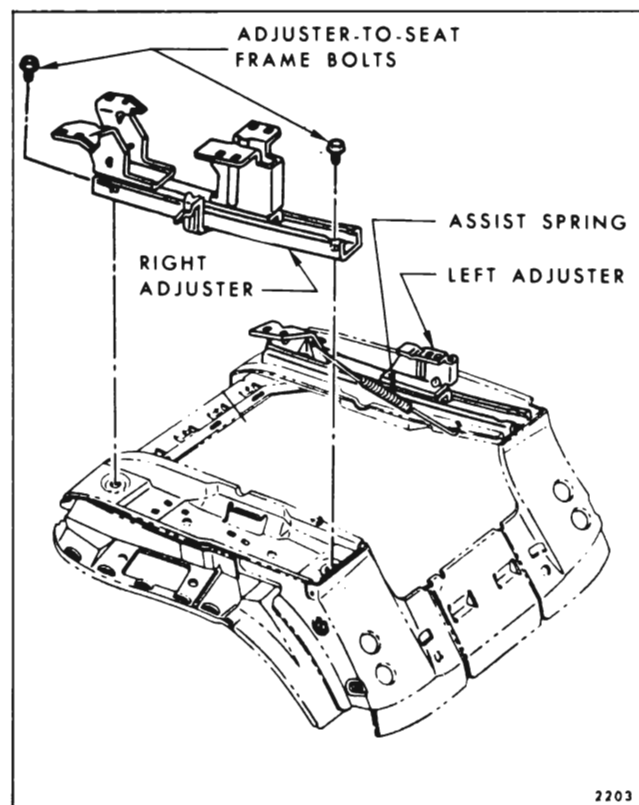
Manual Bucket Seat Adjuster Removal
